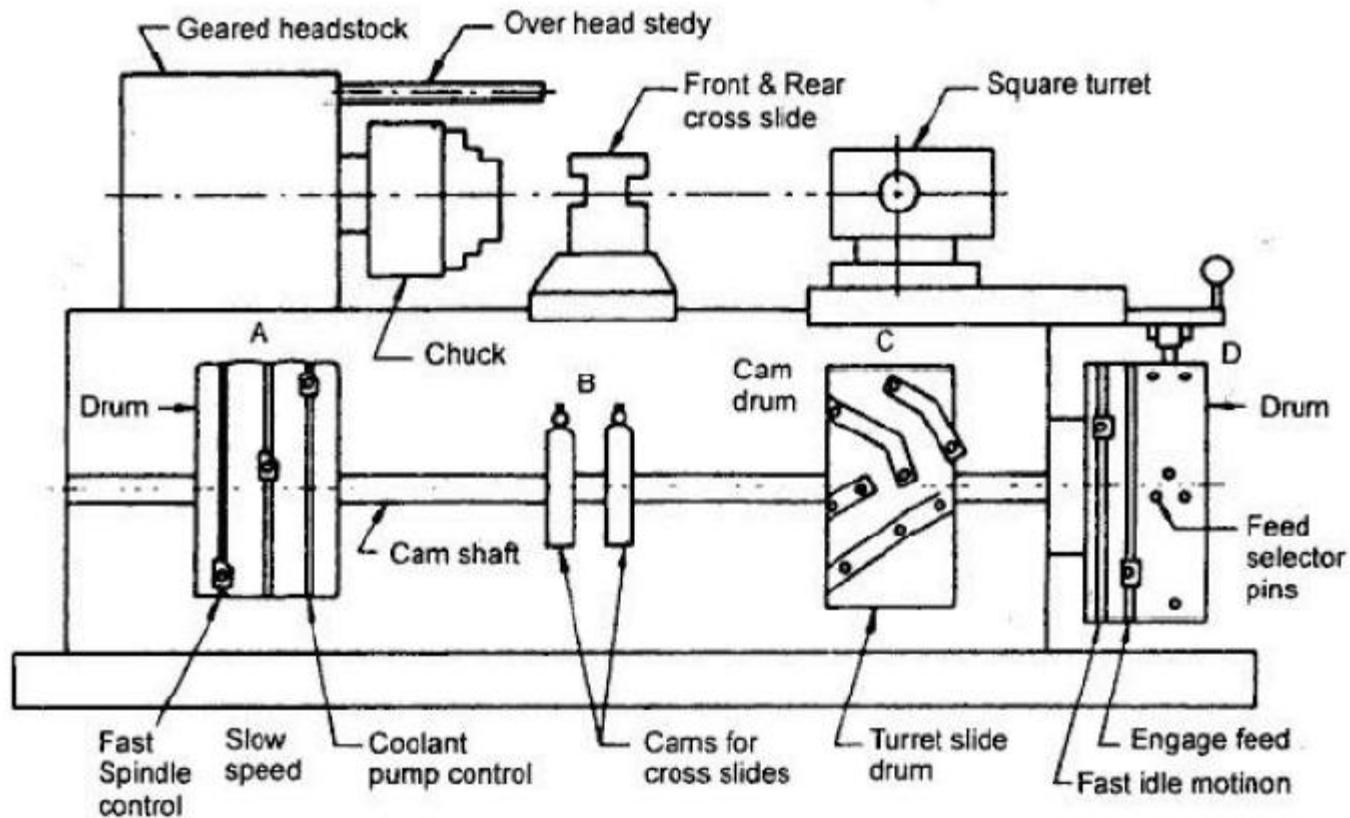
shows a typical single spindle automatic lathe.
